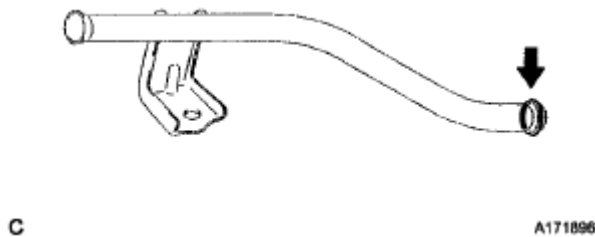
Locating No. 2 Engine Oil Level Dipstick Guide And O-Rings
